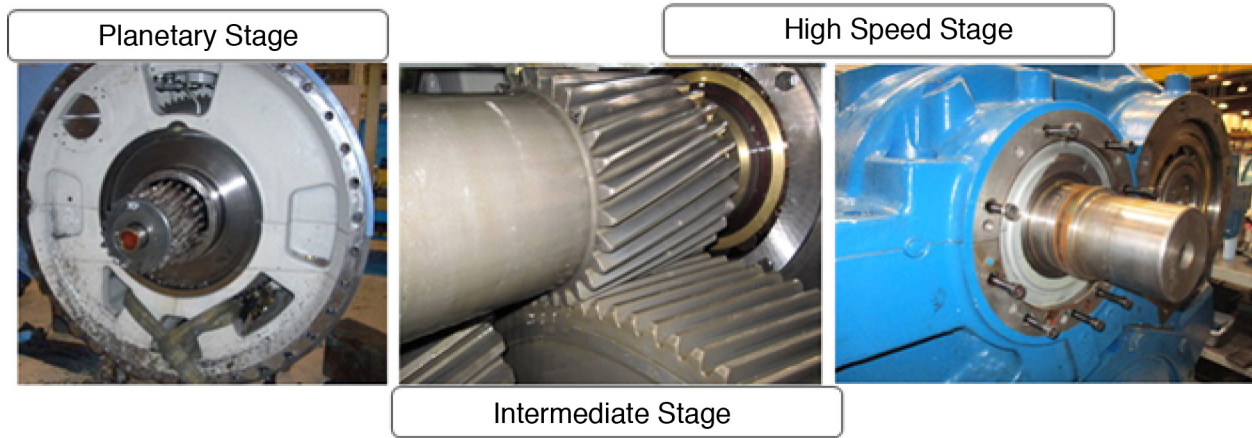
Wind turbine typical three-stage gearbox components (Courtesy of Jeff McLaughlin, Machine Building Specialists)
